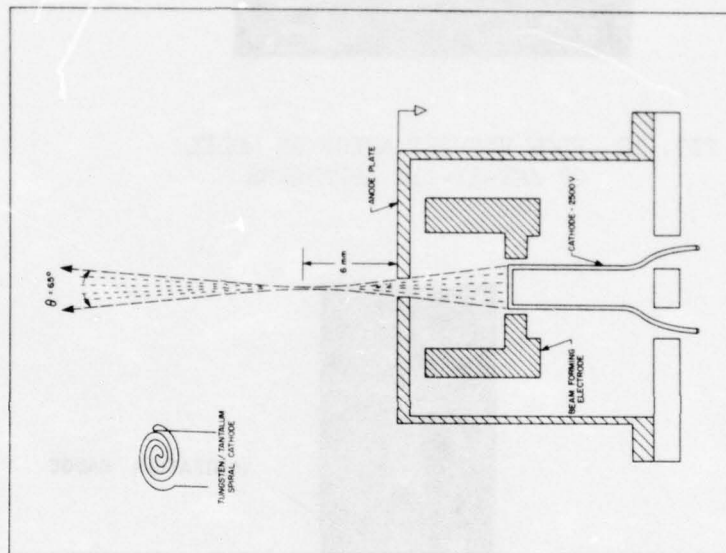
MODIFIED ELECTRON BEAM WELDING GUN FOR FLIGHT
